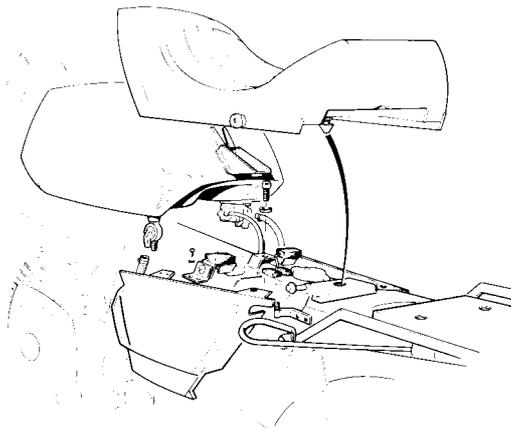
Removing and Replacing the Fuel Tank and Side Covers
